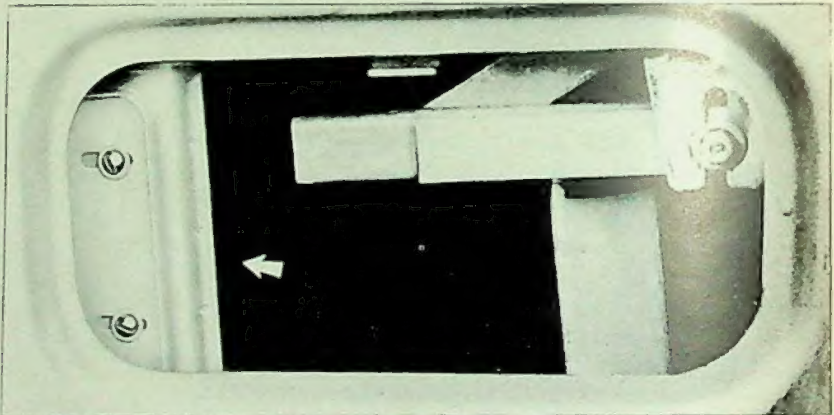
Loosen Three Channel Retaining Screws, then Shift Assembly to Proper Position.
